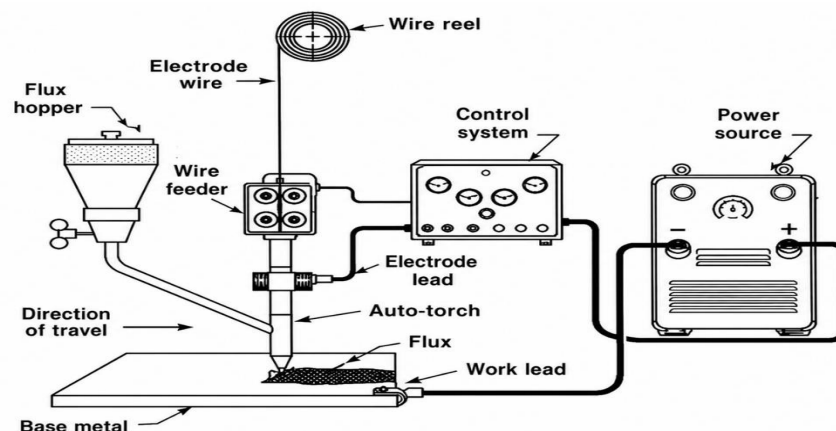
Submerged Arc Welding (SAW) process.
